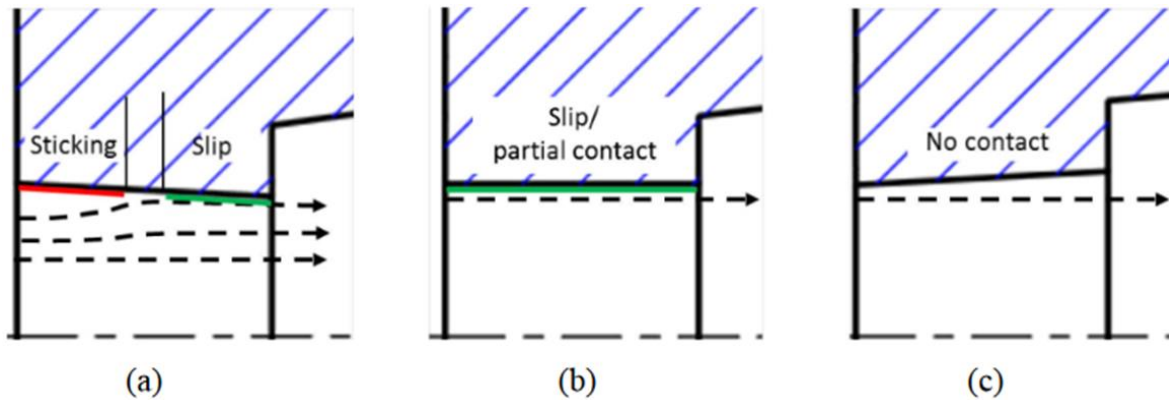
Three types of die geometries and their contact condition with the billet: (a) choked die bearing, (b) flat die bearing, (c) relief bearing [96].
